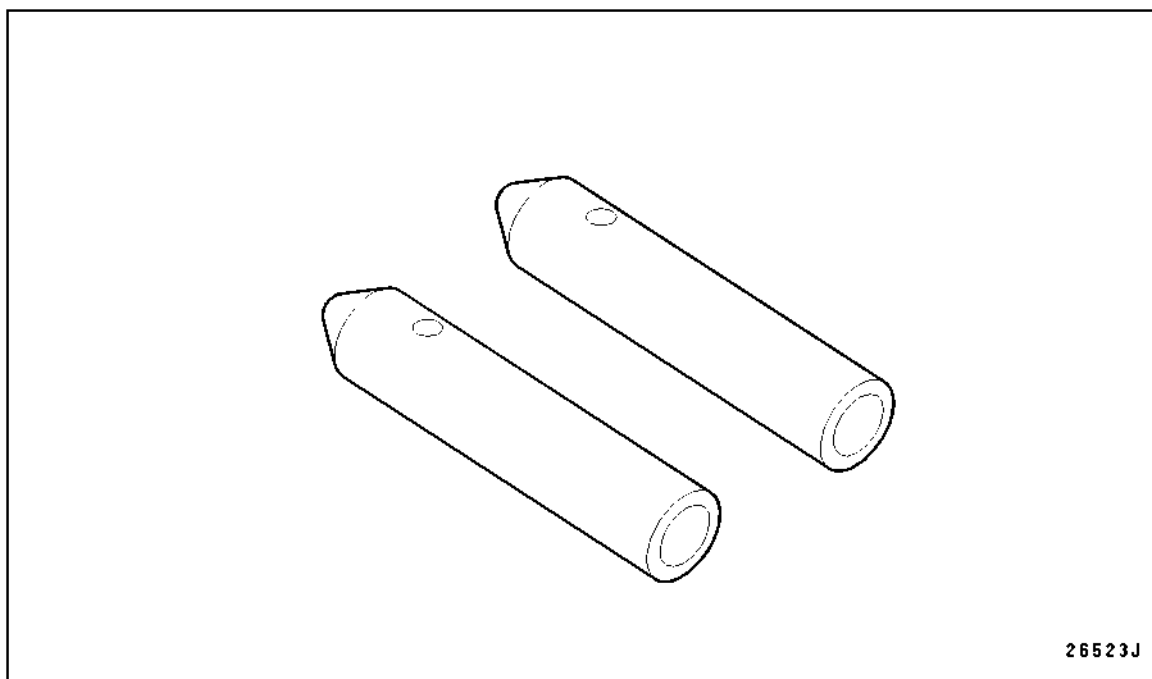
Connecting Rod Guide Caps,J 41969
